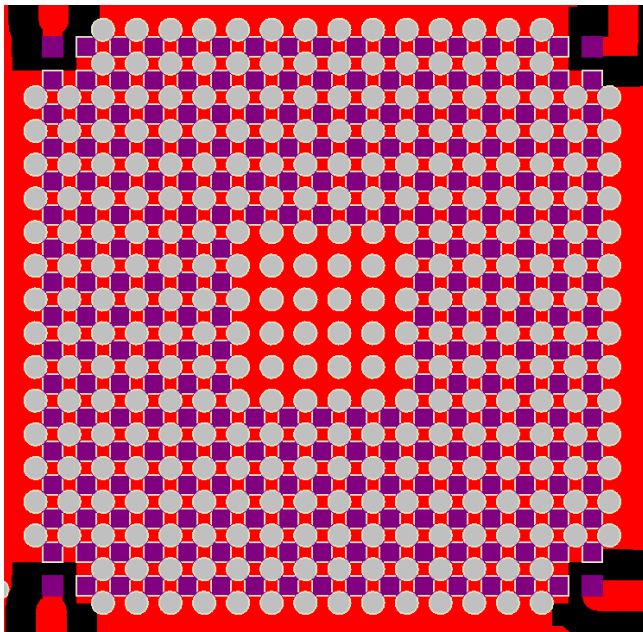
Checkered pattern for DL246A delay line (red: top layer, purple: solder mask, grey: via holes).
